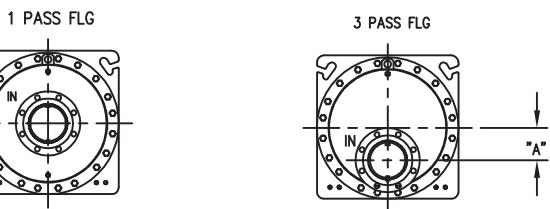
30XW225-300 Unit Dimensions (cont)
